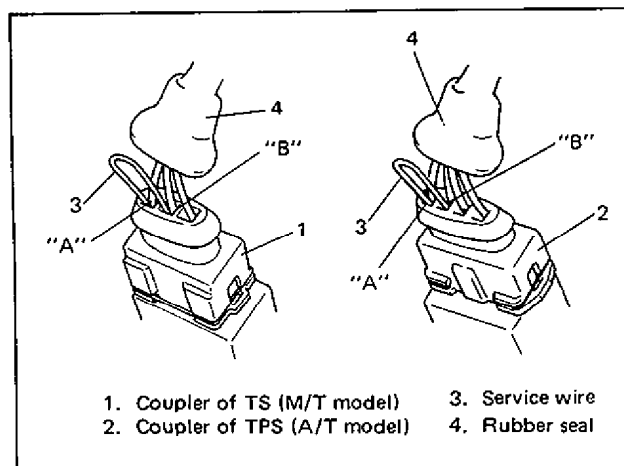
E-140 Short Idle Switch Circuit for Fuel Cut Inspection
